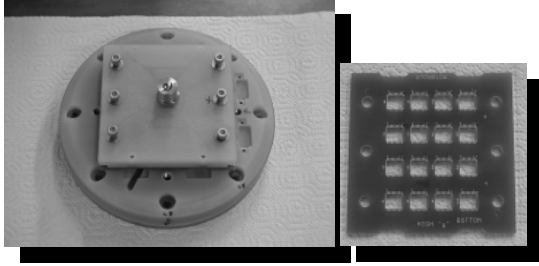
Left photograph shows the accelerometer test fixture on baseline process. Fixture contains 16 devices on the carrier board shown at the right.
